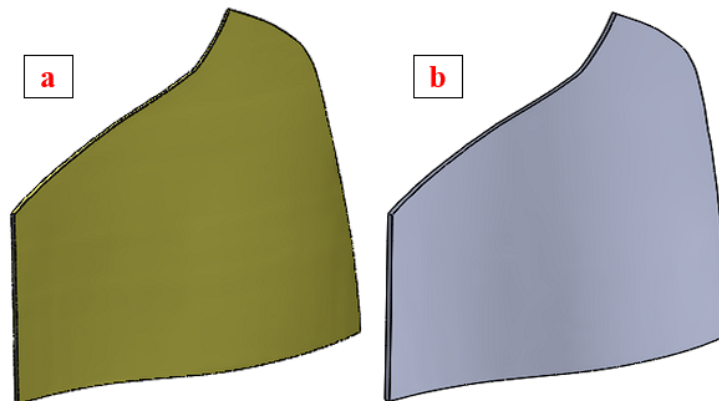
a) The blade surfaces model final, b) The final CAD model of the fan blade
